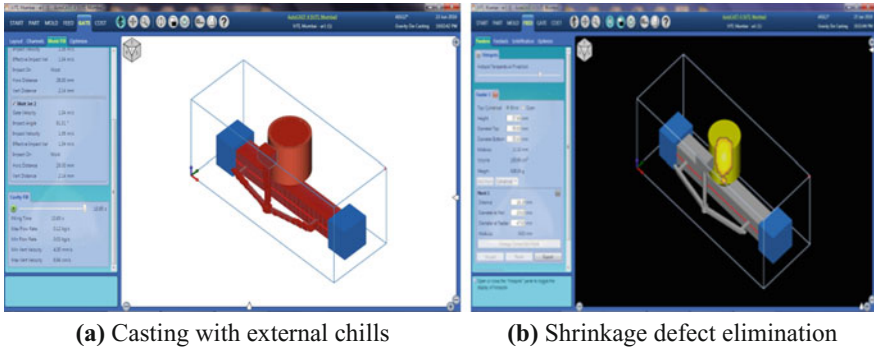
a Casting with external chills. b Shrinkage defect elimination
